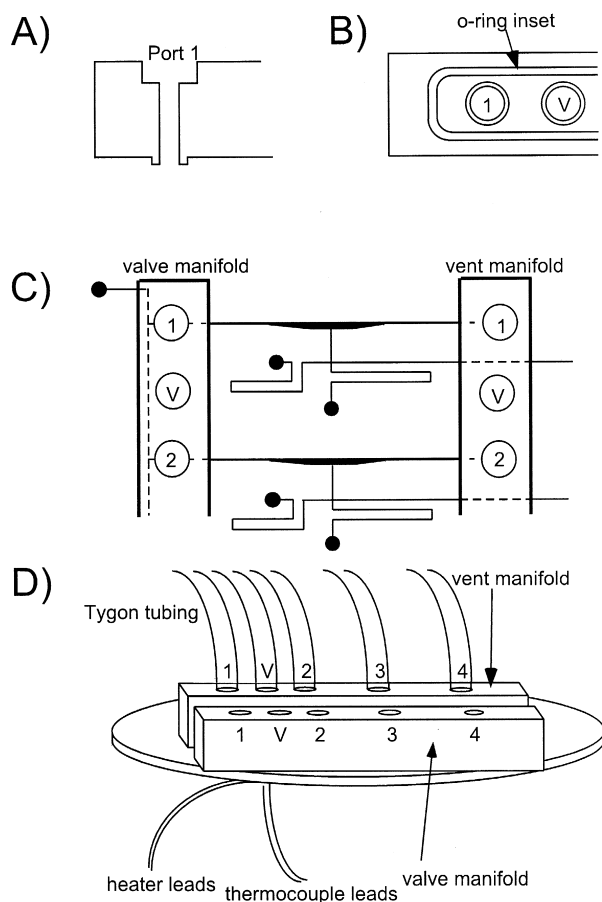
(A) Cross-sectional, (B) bottom, (C) top and (D) oblique views of the valve and vent block structures. The four ports (1–4) connect external valves to the manifold. The vacuum seal port (V, positioned between the tube ports) is used to hold the manifold to the chip when vacuum is applied.
